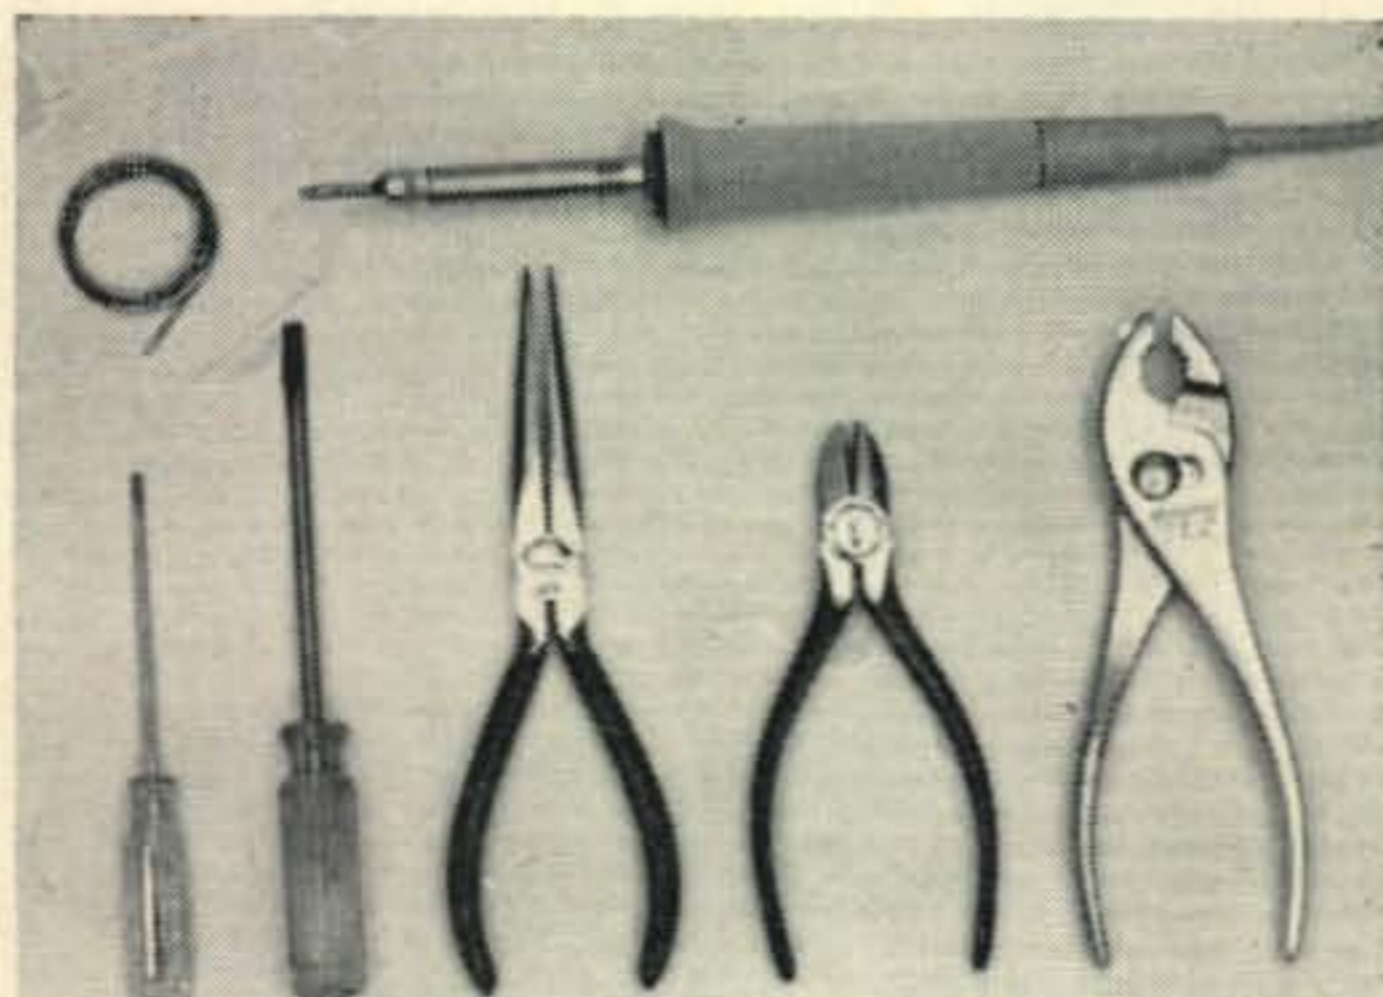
Pictured in top row, left to right: rosin core solder, light duty pencil-type soldering iron. Bottom row, left to right: $\frac{1}{8}$ " blade screw driver, $\frac{3}{16}$ " blade screwdriver, long nose pliers, diagonal cutters and combination wrench.
